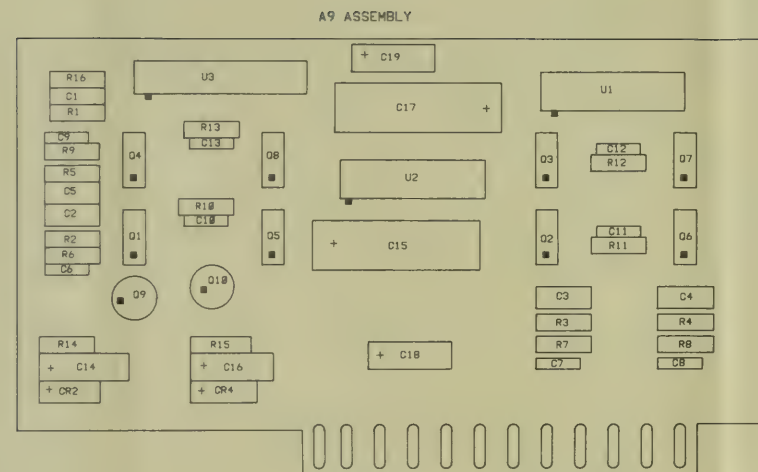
A9 Attenuator Driver Assembly Component Locations
